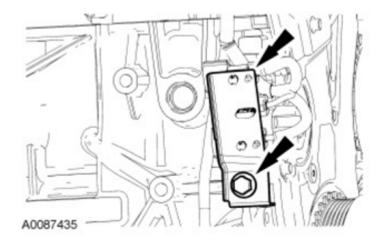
Locating Bolt And Engine Wiring Harness Connector Bracket Courtesy of FORD MOTOR CO.
